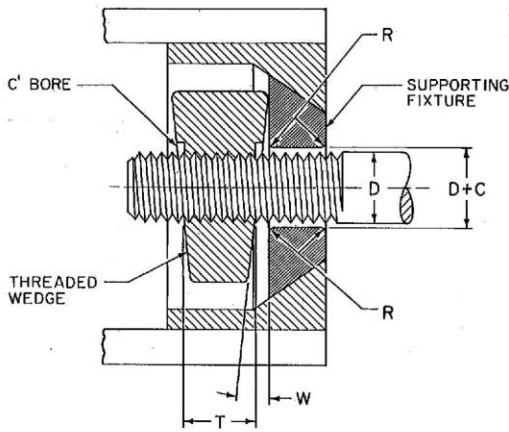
TENSILE TESTING OF FULL SIZE BOLT OR SCREW
